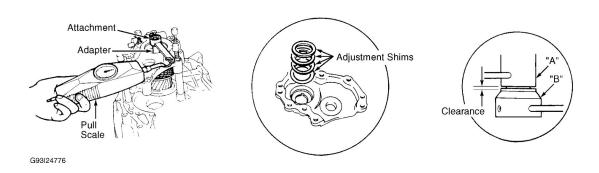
Measuring Output Gear Bearing Preload Courtesy of MAZDA MOTORS CORP.
